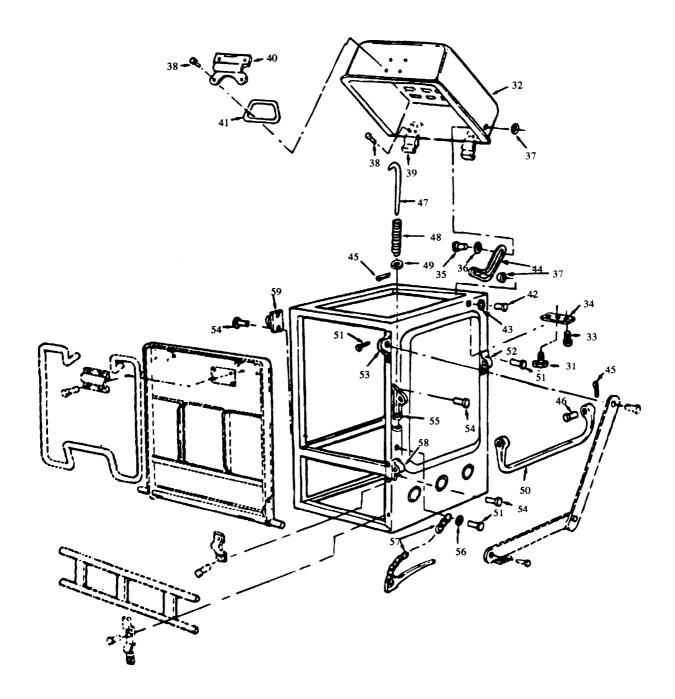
Cabinet Assembly (Sheet 2 of 3)
